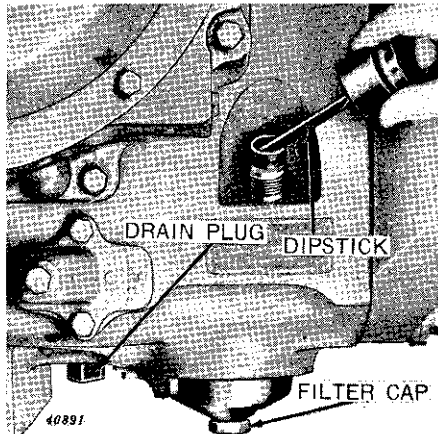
Diesel Engine Crankcase Dip Stick
